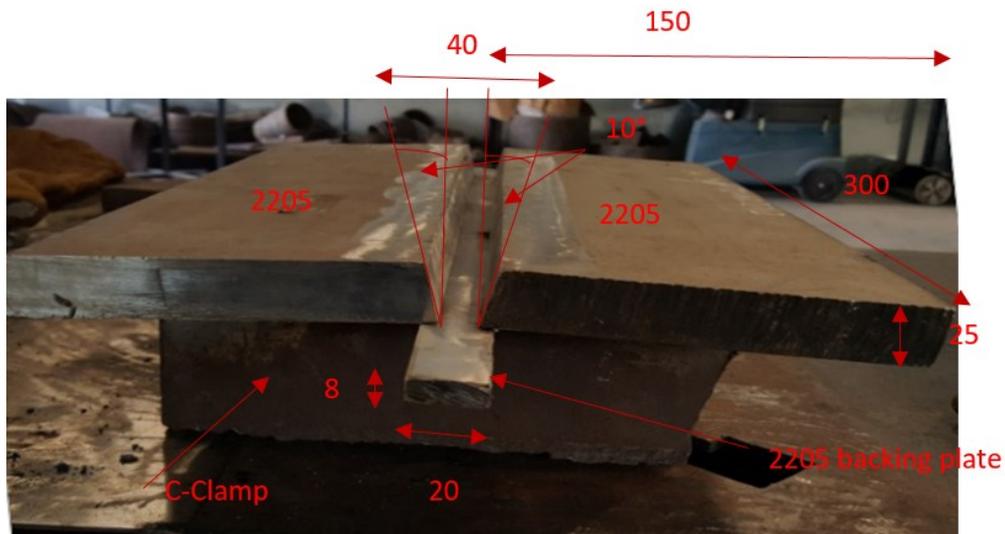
Weld Test Coupon prepared for welding
